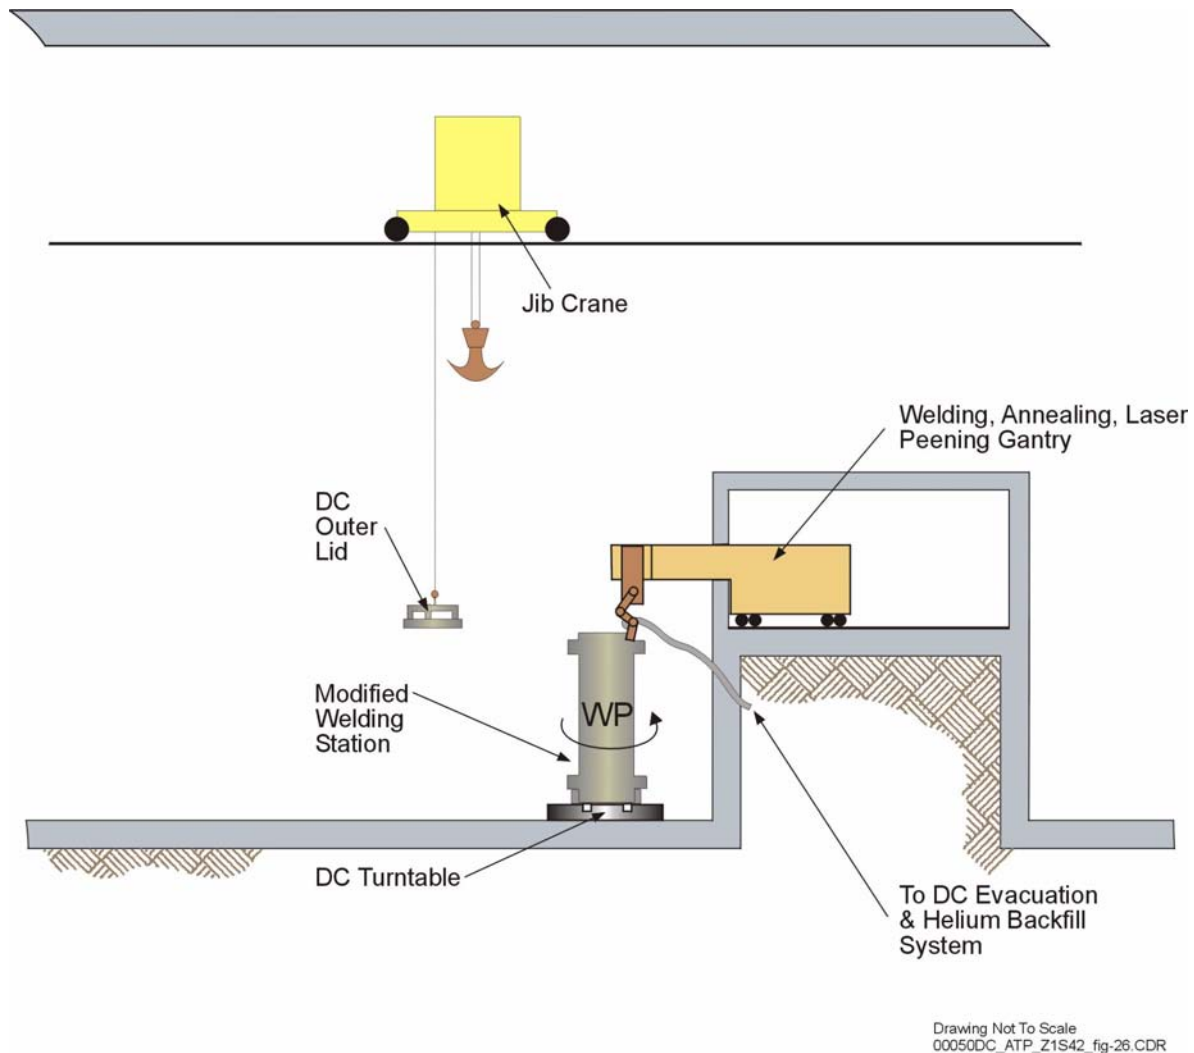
Conceptual Design of Remote Welding, Annealing, and Laser Peening for the Closure Welding of the Waste Package
